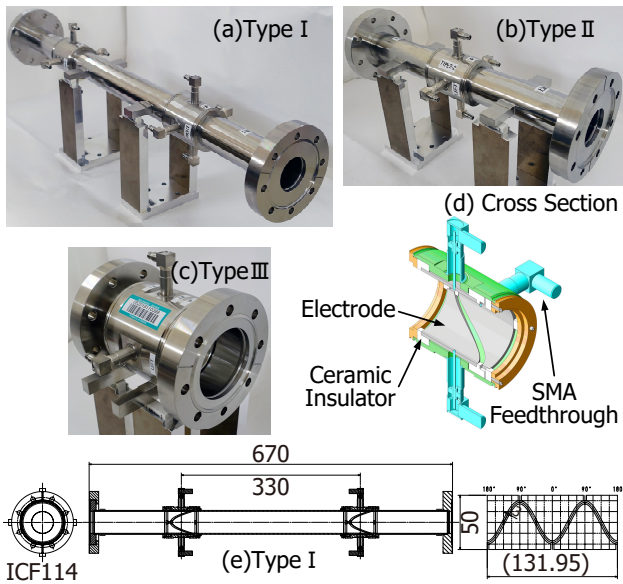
Photographs of the 3 types of BEPM: (a) Type I, (b) Type II, and (c) Type III. (d) Cross section drawing of a BEPM. (e) Schematic drawing of Type I.
